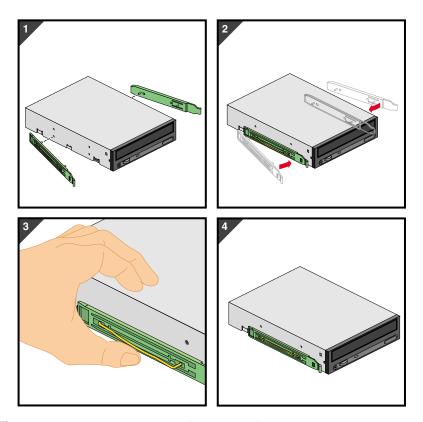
Mounting Drive Rails to 5.25-inch Drives
